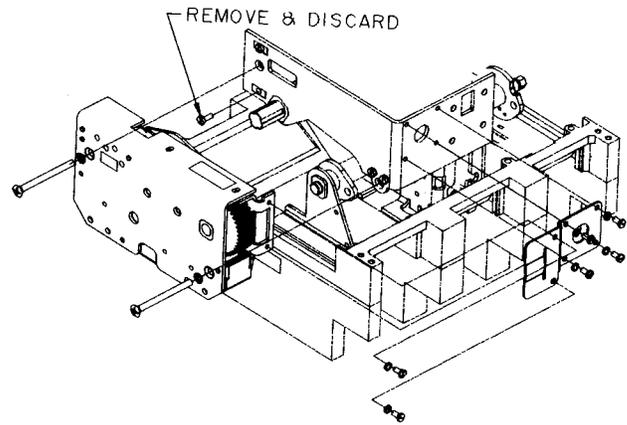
Installing the Motor Operator Mechanism onto the breaker.
